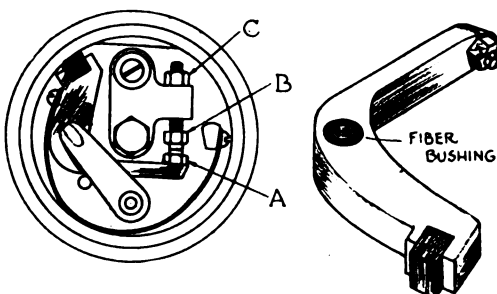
The hole in the fiber bushing of the interrupter arm may be enlarged a trifle if the interrupter arm sticks. A is the non-adjustable contact. The adjustable contact B is held fixed by the lock nut C which, when loosened, allows the hexagon screw B to be turned in or out
